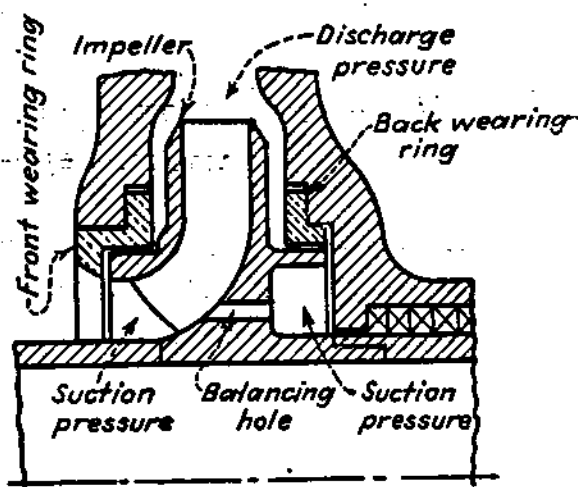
A single-suction impeller with leakage joints of equal diameter on both sides and with balancing holes to obtain hydraulic balance.
